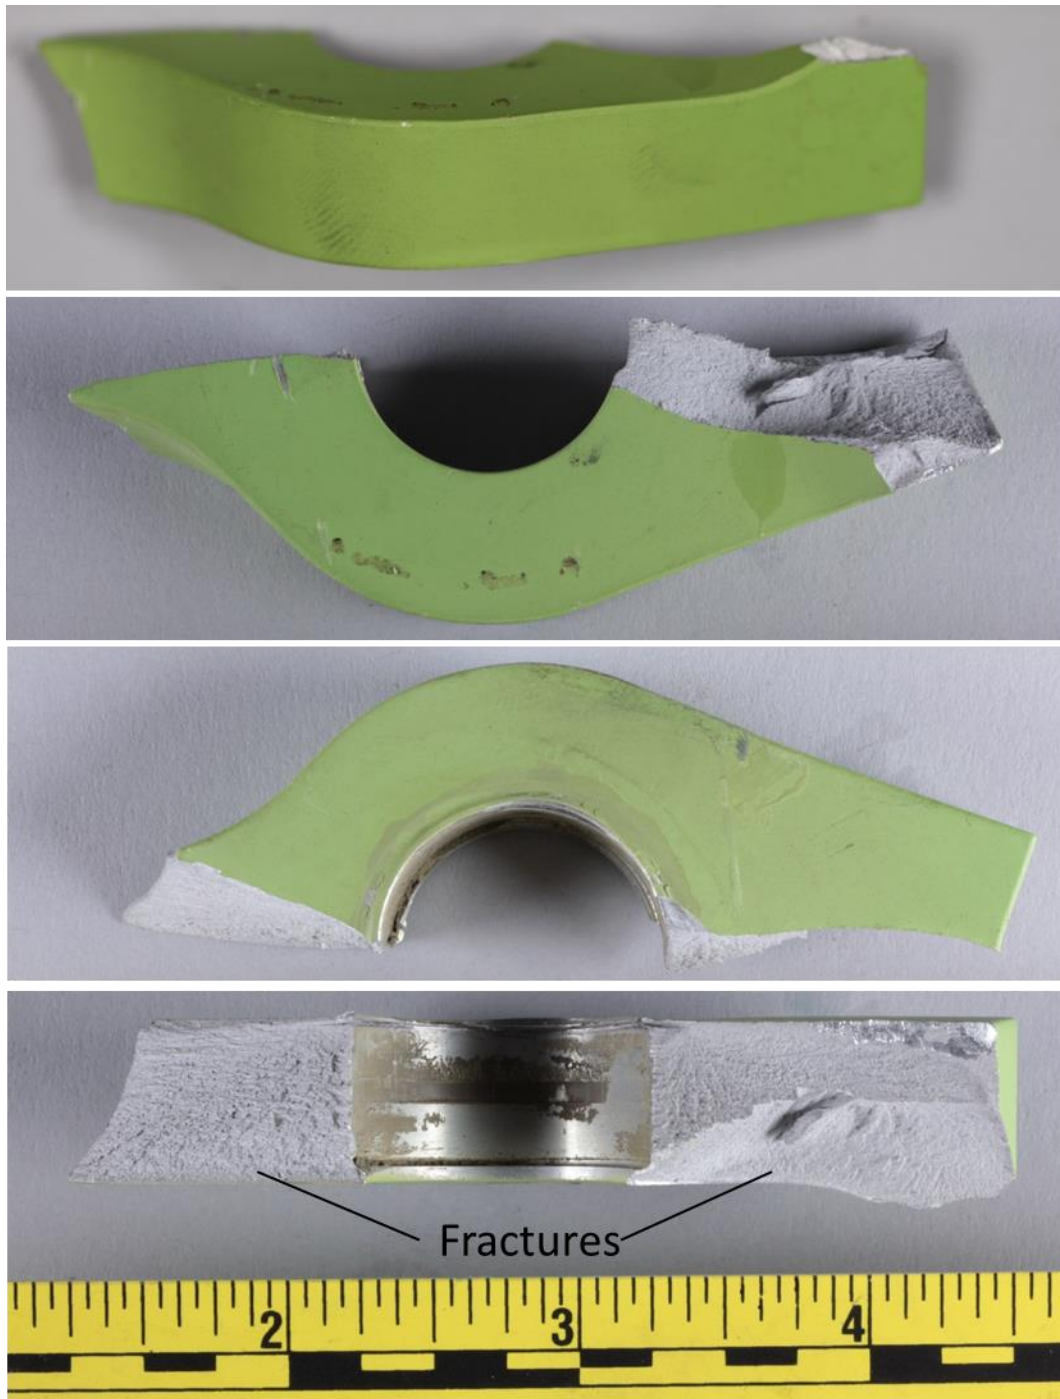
Views of the piece of overhead bin vertical tie rod attach. The fracture surfaces are identified in the lower-most image.
